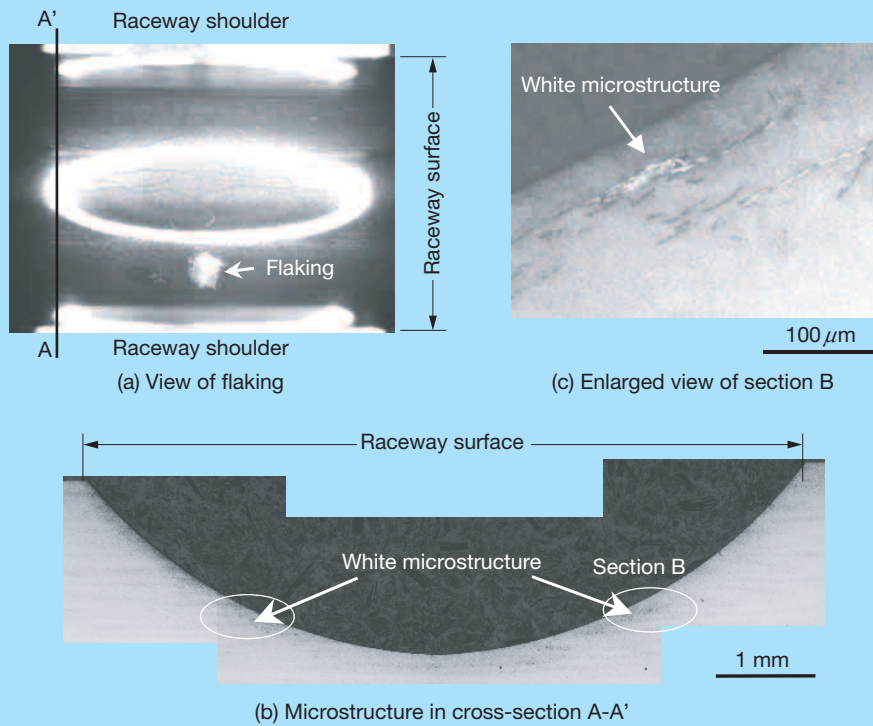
Example of flaking and cross-section views of tested bearing's internal structure
